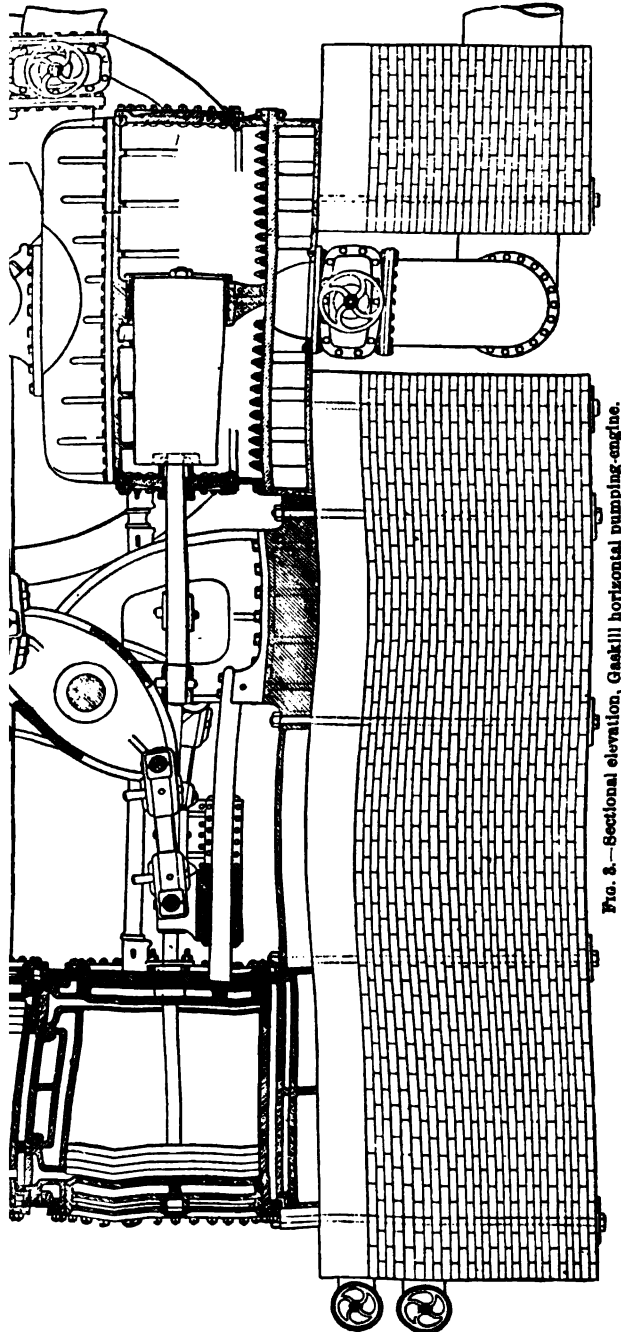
Sectional elevation, Gaskill horizontal pumping engine.
